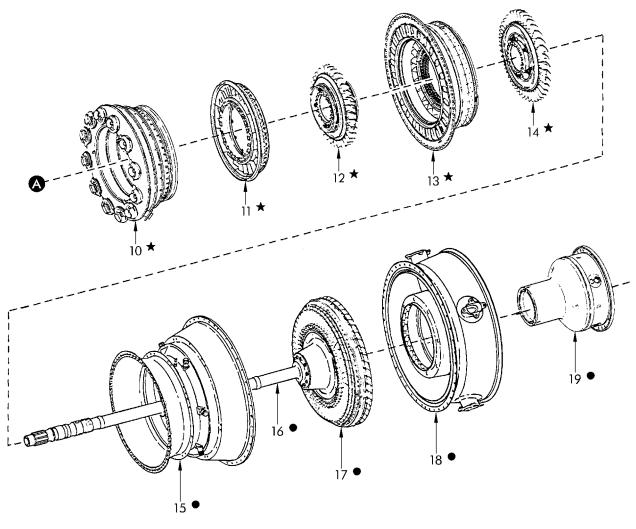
(T701, T701C, T701D) Major Engine Components (Typical) (Sheet 2 of 2)
